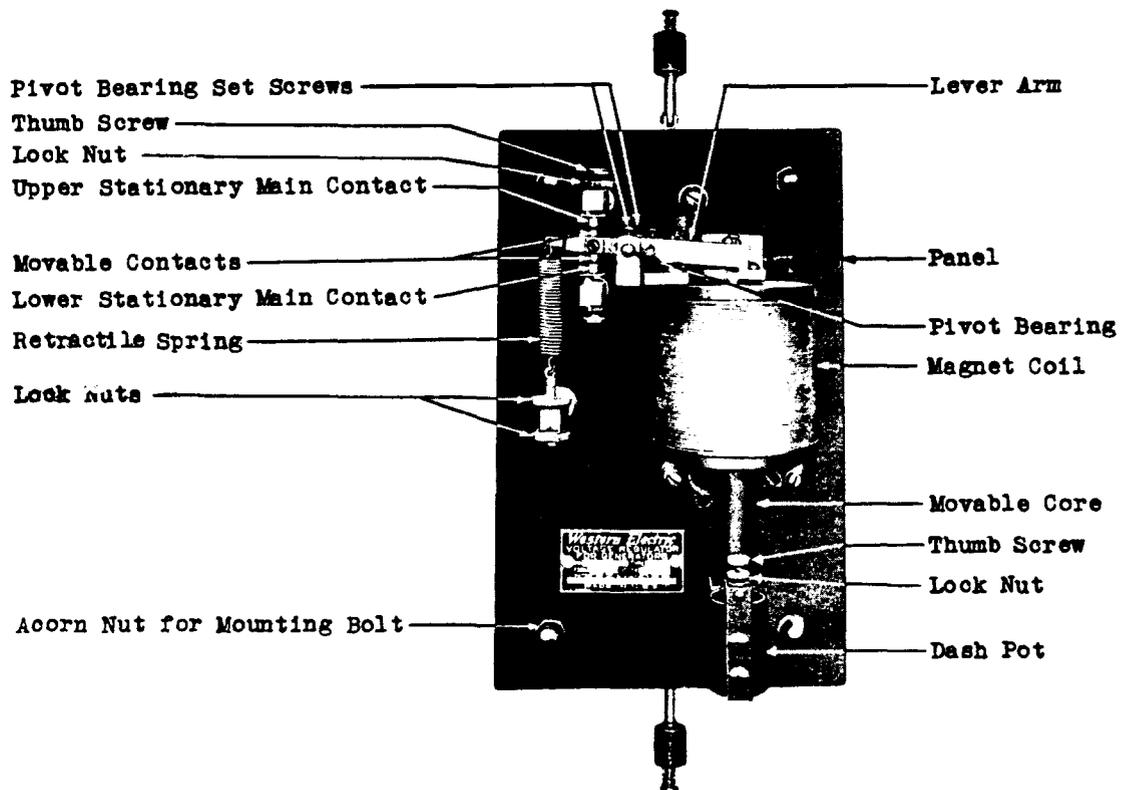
Regulator Assembly (Front View Cover Removed)
